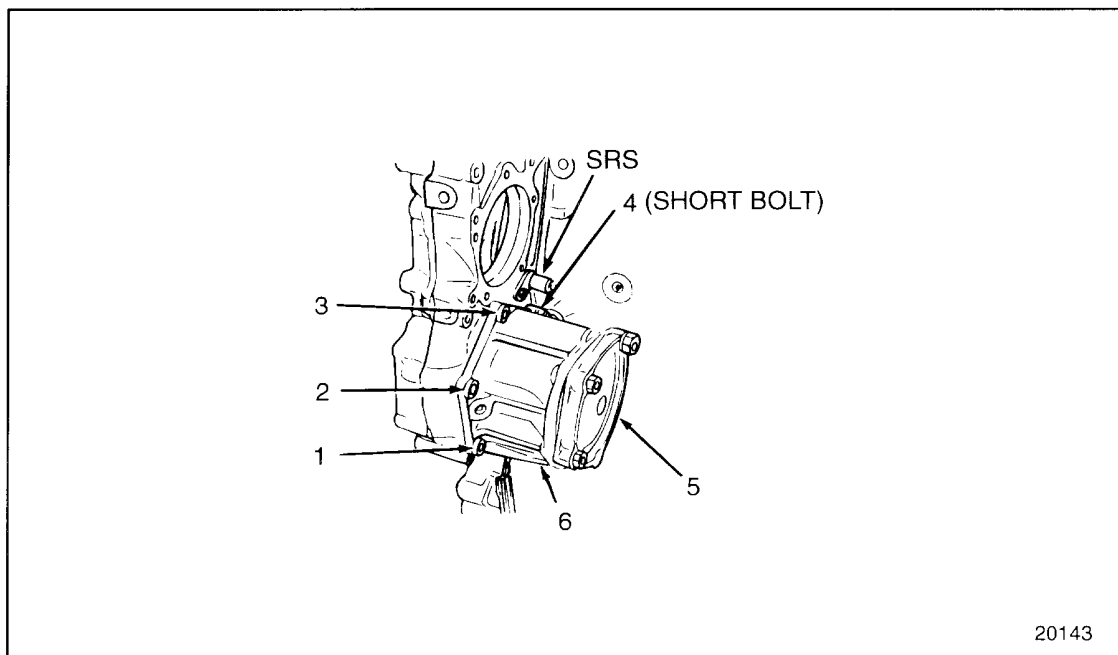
Gear Case Cover Bolt Arrangement (Left Rear)
